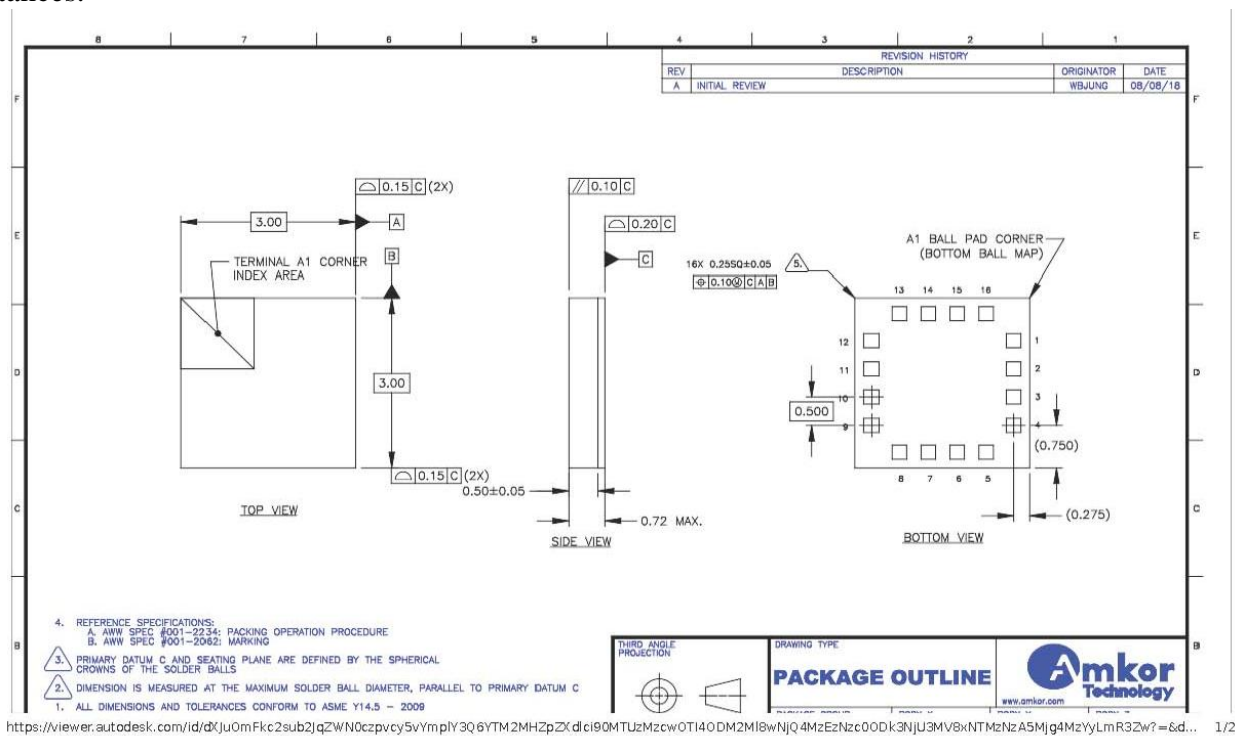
LGA 16-Pin Package Drawing (All Dimensions in mm)
